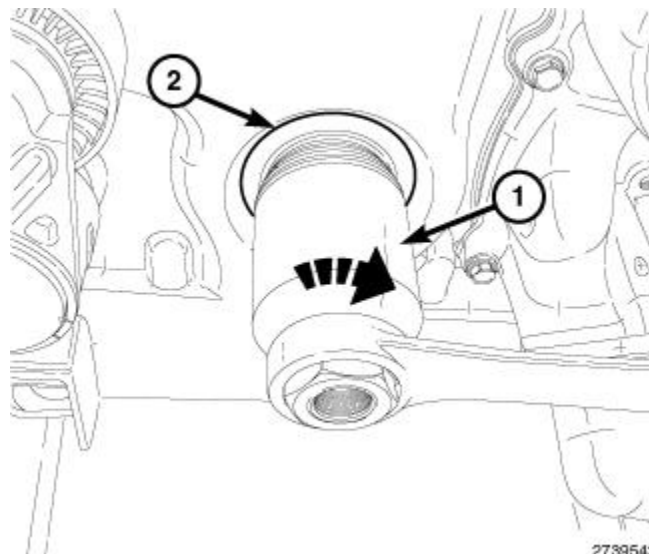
Seal Remover & Front Crankshaft Oil Seal
